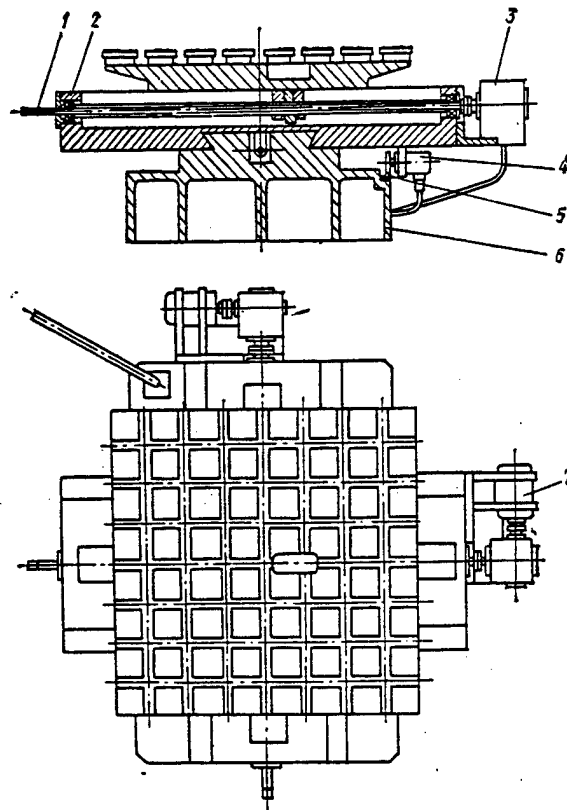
Jig for Program Control of Machining a Set of Holes on Radial Drilling Machines
